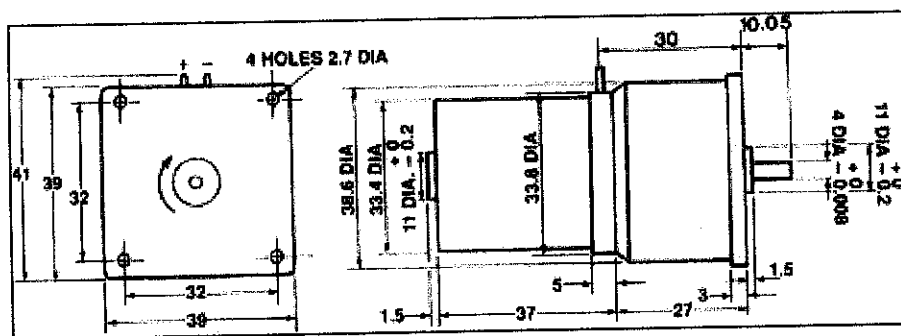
Drawing and Dimension of 12V 60 rpm RS DC Motor for Joint 1
